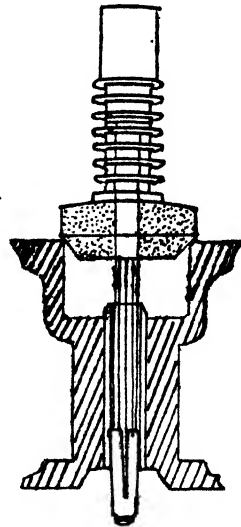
Valve Seating Tool with Conical Stone Grinder and Pilot in Valve Guide.
